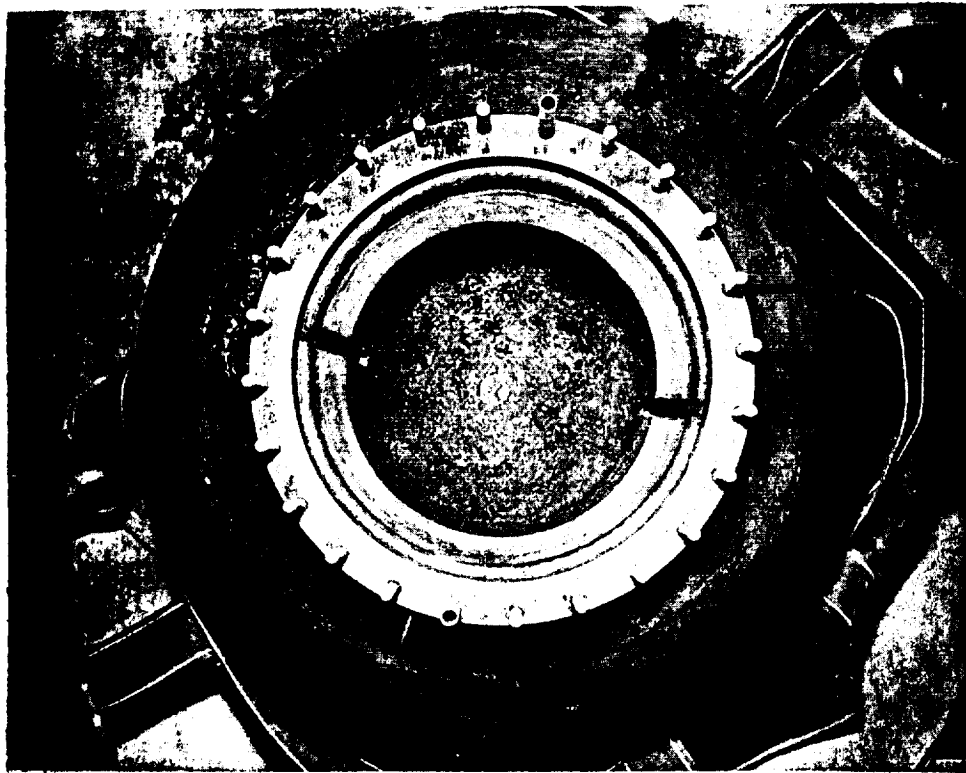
Propellant Surface Defects in Motor 17SX-1.
